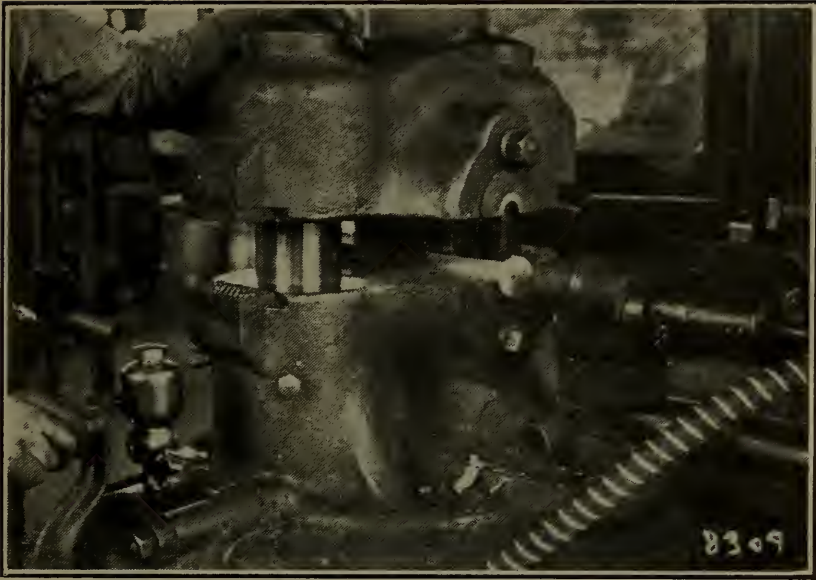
A rock drill sharpening machine applied to forging bolt heads.
